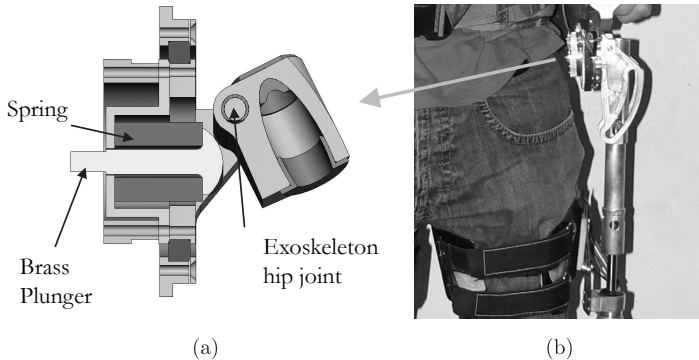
Hip abduction spring. In (a), a coronal section drawing is shown of the abduction spring sub-assembly at the hip joint. It is uni-directional so it allows the leg to freely abduct. The spring is kept in place by means of a keeper that attaches to the exoskeletal hip joint assembly. The keeper is grounded to the sagittal plane bearing so that the keeper rotates with the exoskeletal leg. A brass plunger fits through a hollow spring, allowing the spring to be compressed during hip abduction. In (b), a view of the abduction spring location is shown on the exoskeletal leg.
